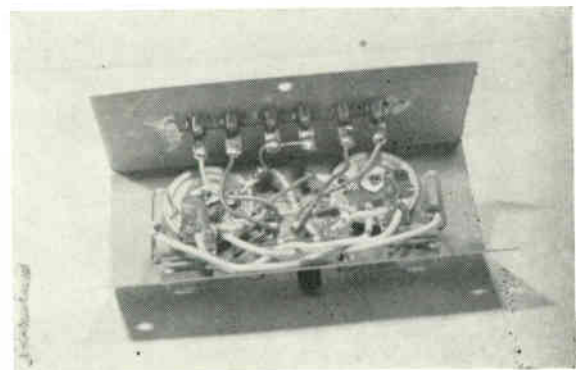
A wiring diagram and an internal view (Fig. 4, below) of the completed stereo headphone adapter should help construction buffs in building the device.
